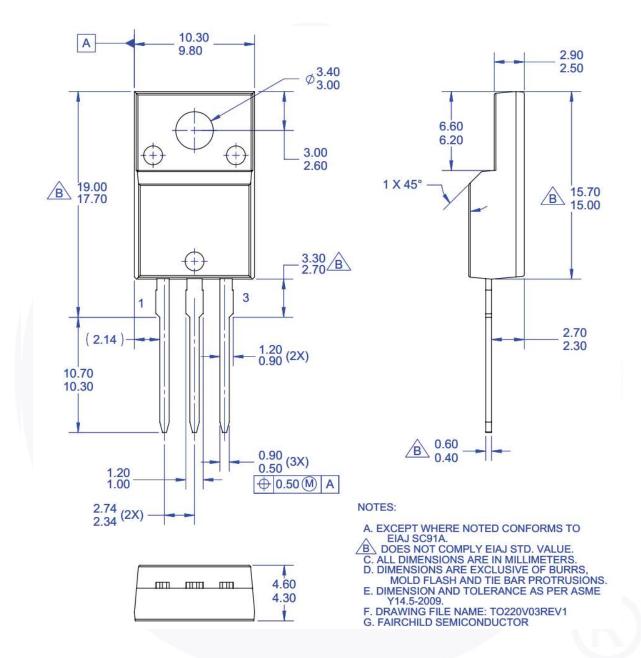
TO220, Molded, 3LD, Full Pack, EIAJ SC91, Takcheong
